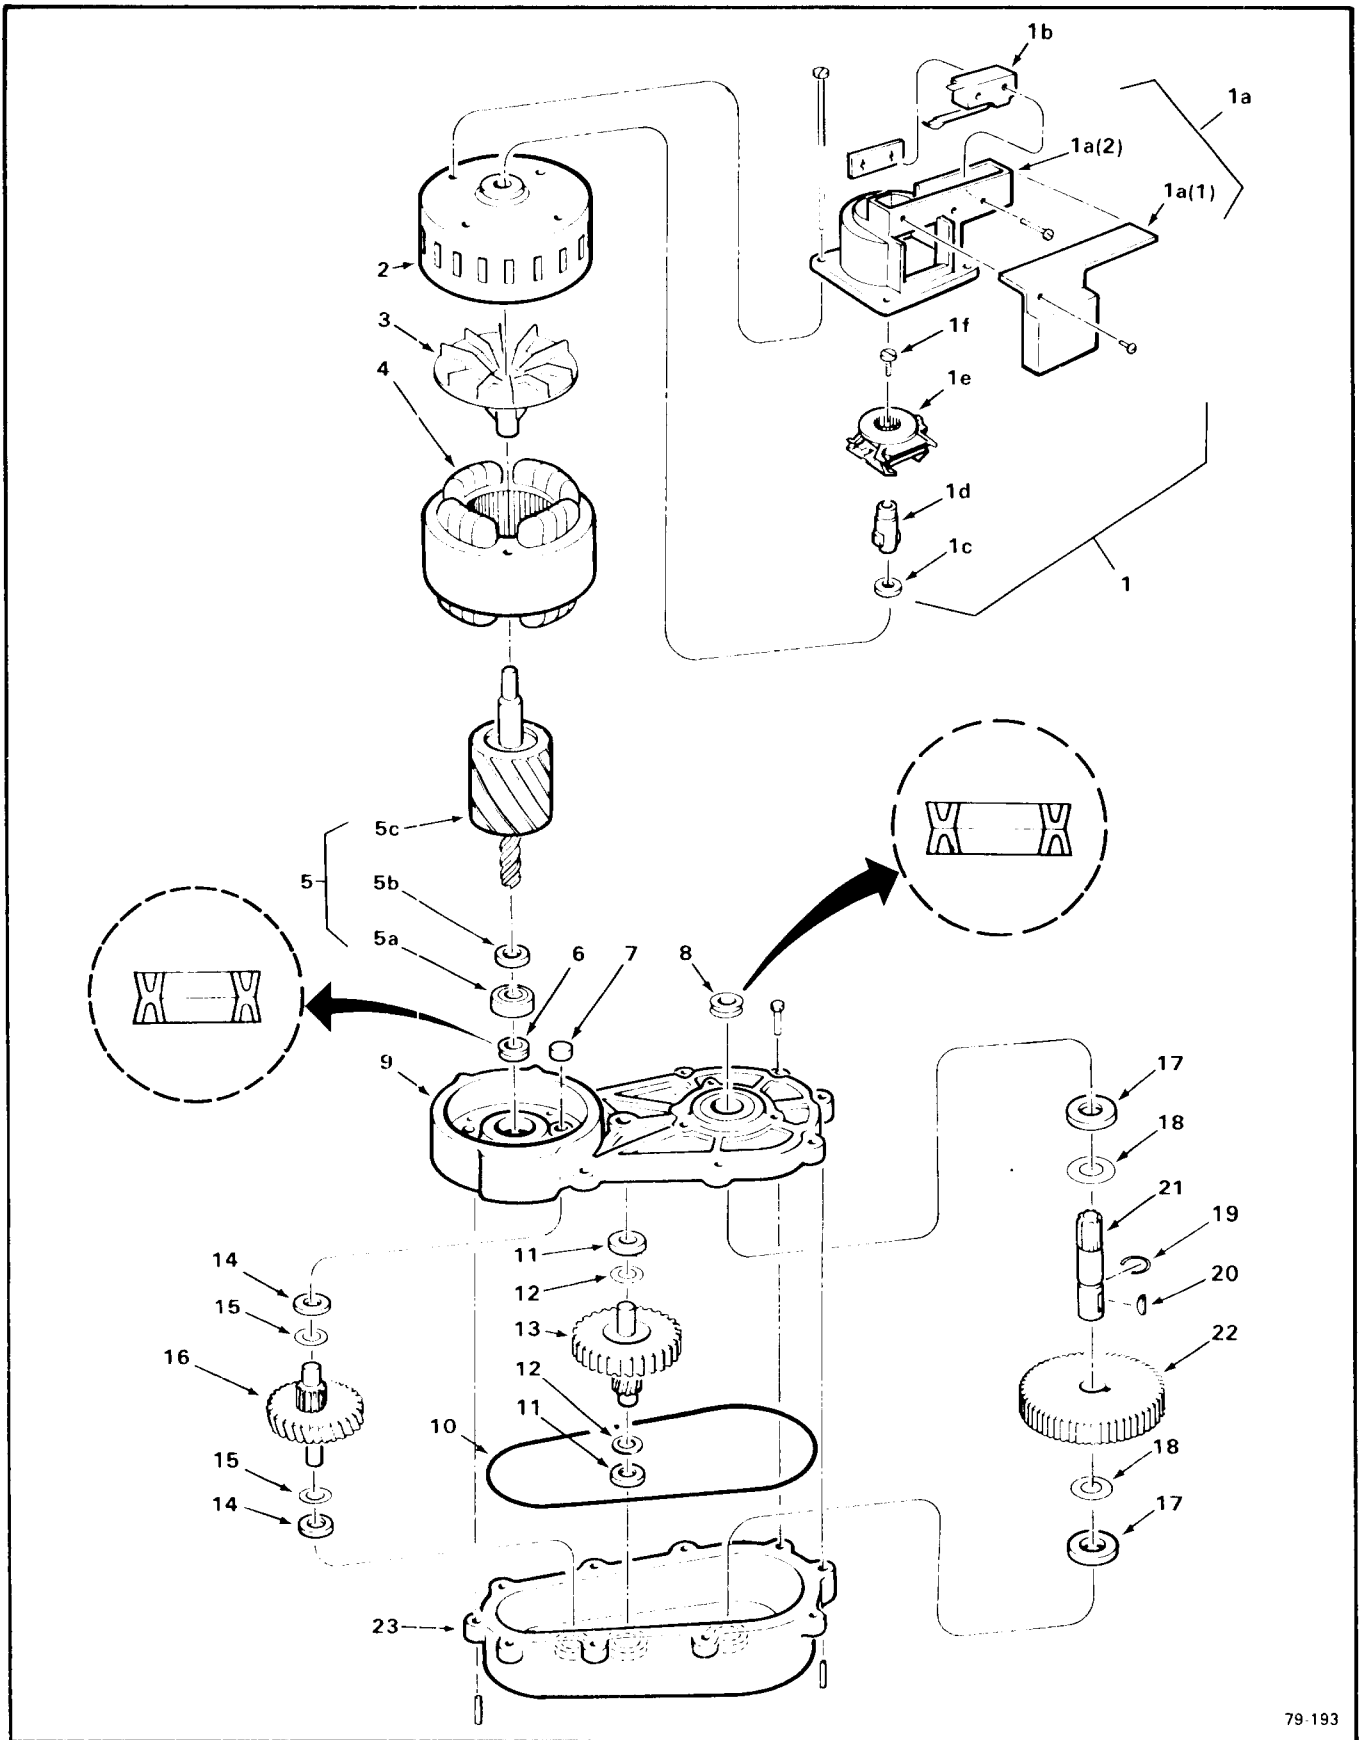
Drivemotor Assembly - PMF450 1/10 H.P.
